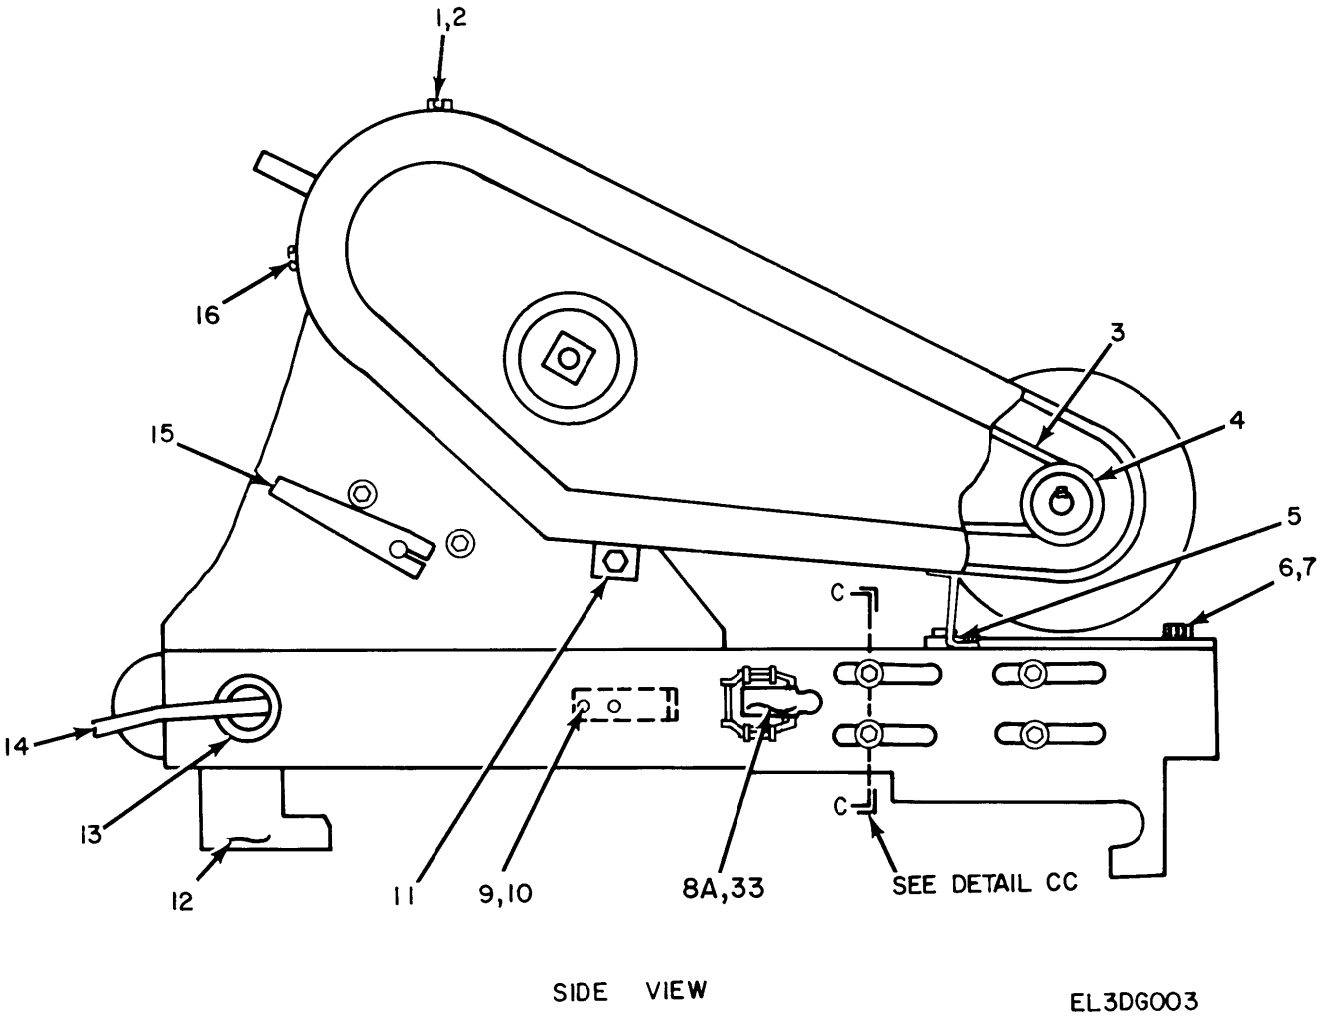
Reeling Machines, Cable, Motor driven RL-172/G and RL-172A/G (Sheet 1 of 3).
